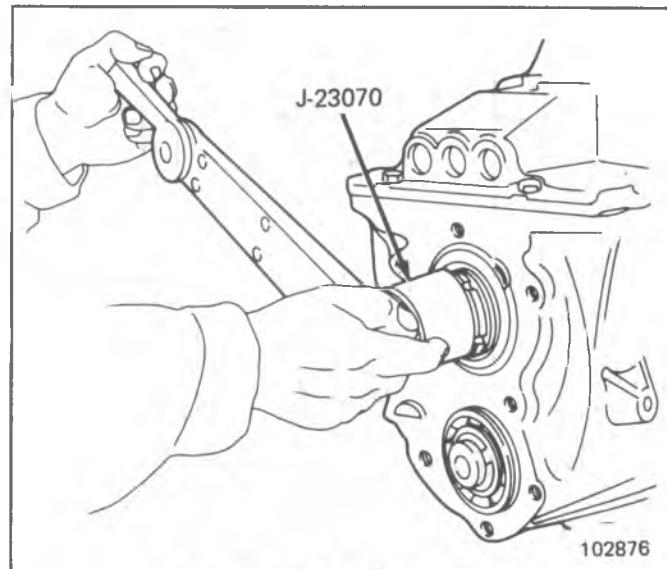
B4-30--Mainshaft Rear Bearing Lock Nut
